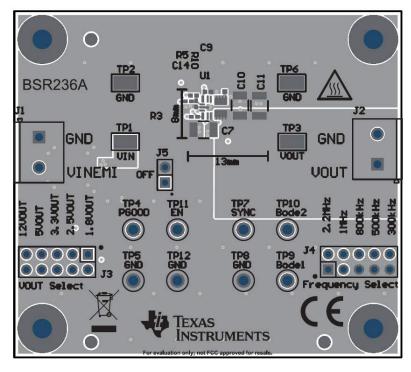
PCB Top 2-D (TPSM33625EVM)
